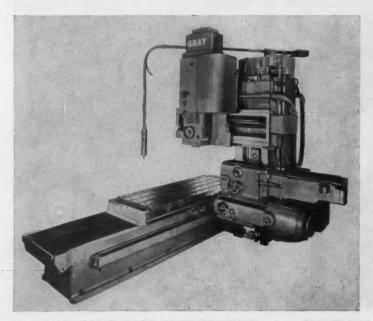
, "Handymill" to be shown by G. A. Gray Co. has built-in chip conveyor
